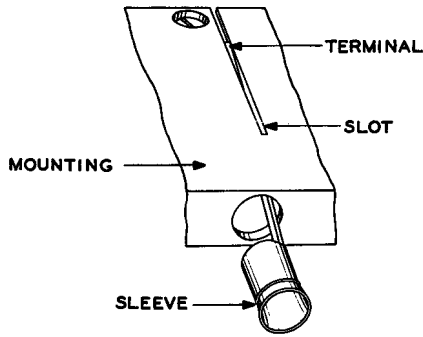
Method of Inserting Sleeve Into the 49-Type Jack
